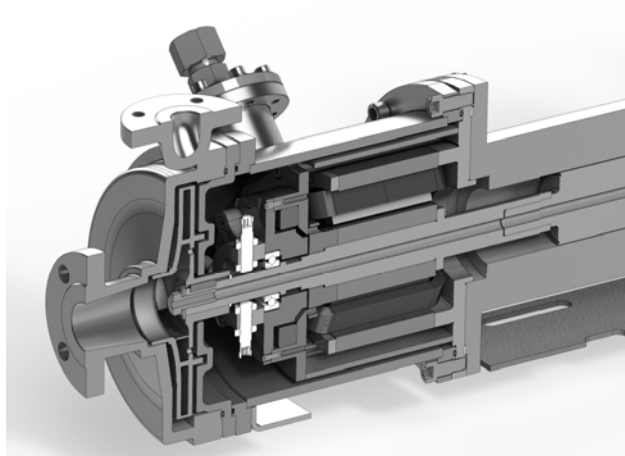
shows the final design of the modified Teikoku 204TF1 pump and figure 3 shows a closer view of the front magnetic bearing.
